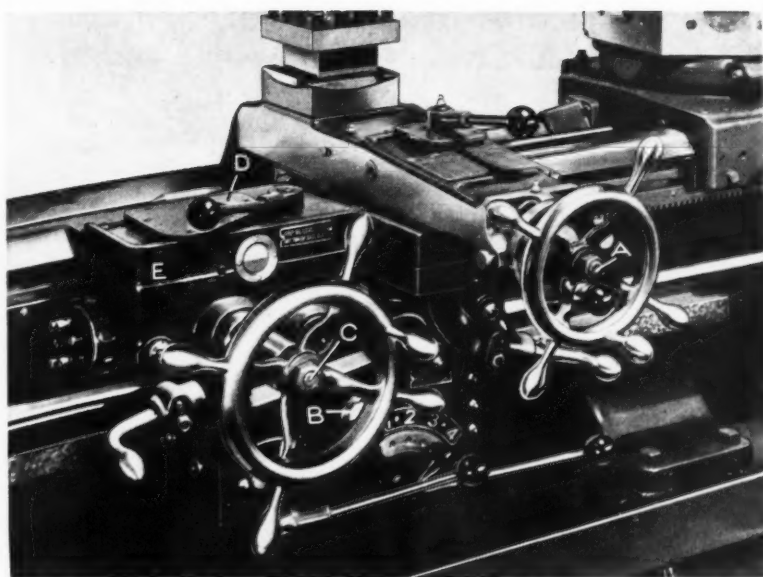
Cross-slide Carriage of a Heavy-duty Turret Lathe Equipped with an Automatic Lubricating System
